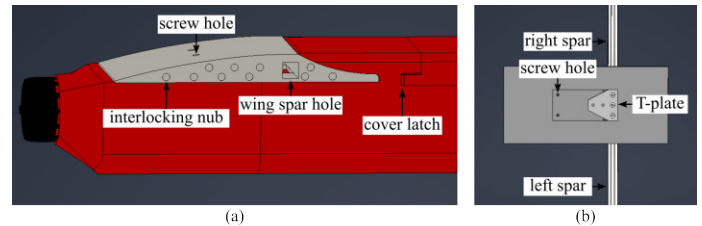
CAD views of the UAV: (a) cross-sectional view of the wing box and fuselage interface and (b) bottom-up view of the wing box coupling to the spars.
